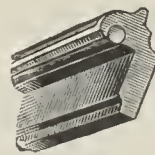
Improved Flanging Jaw with Steel Roller.
